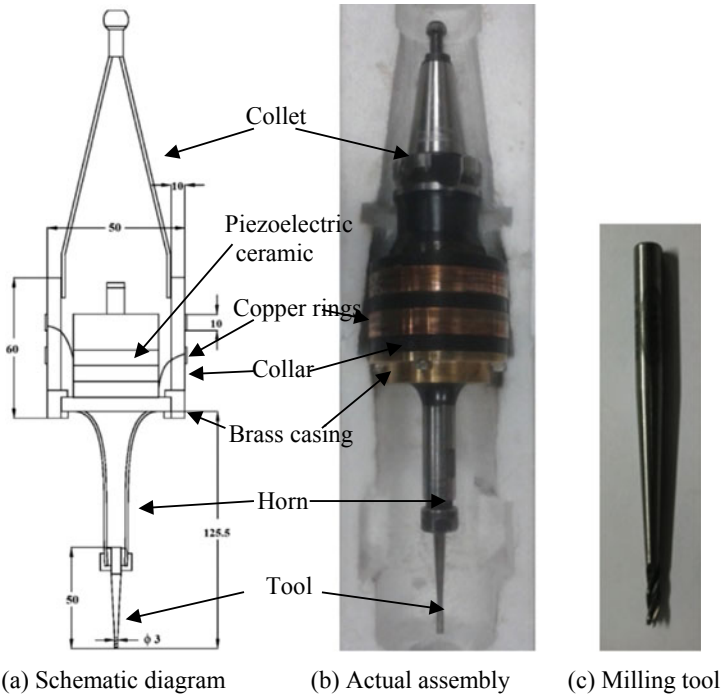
Ultrasonic horn and tool assembly for end milling [20, 21]
